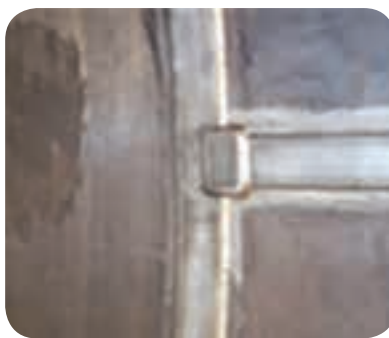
GTAW and plasma welding being applied to the sleeve joint.
